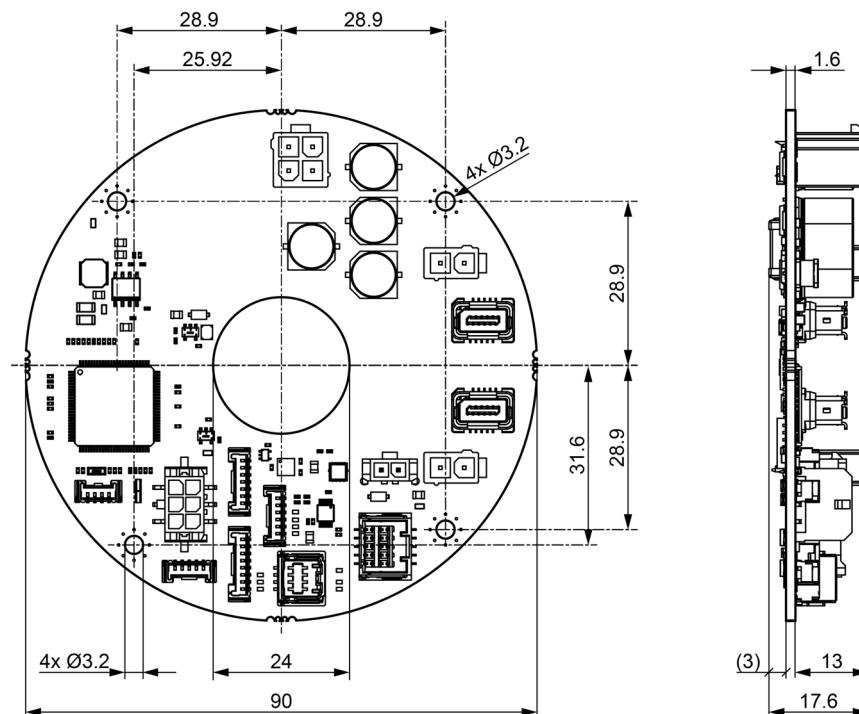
EPOS4 Disk 60/12 CAN SSC (709859) – Dimensional drawing [mm]
